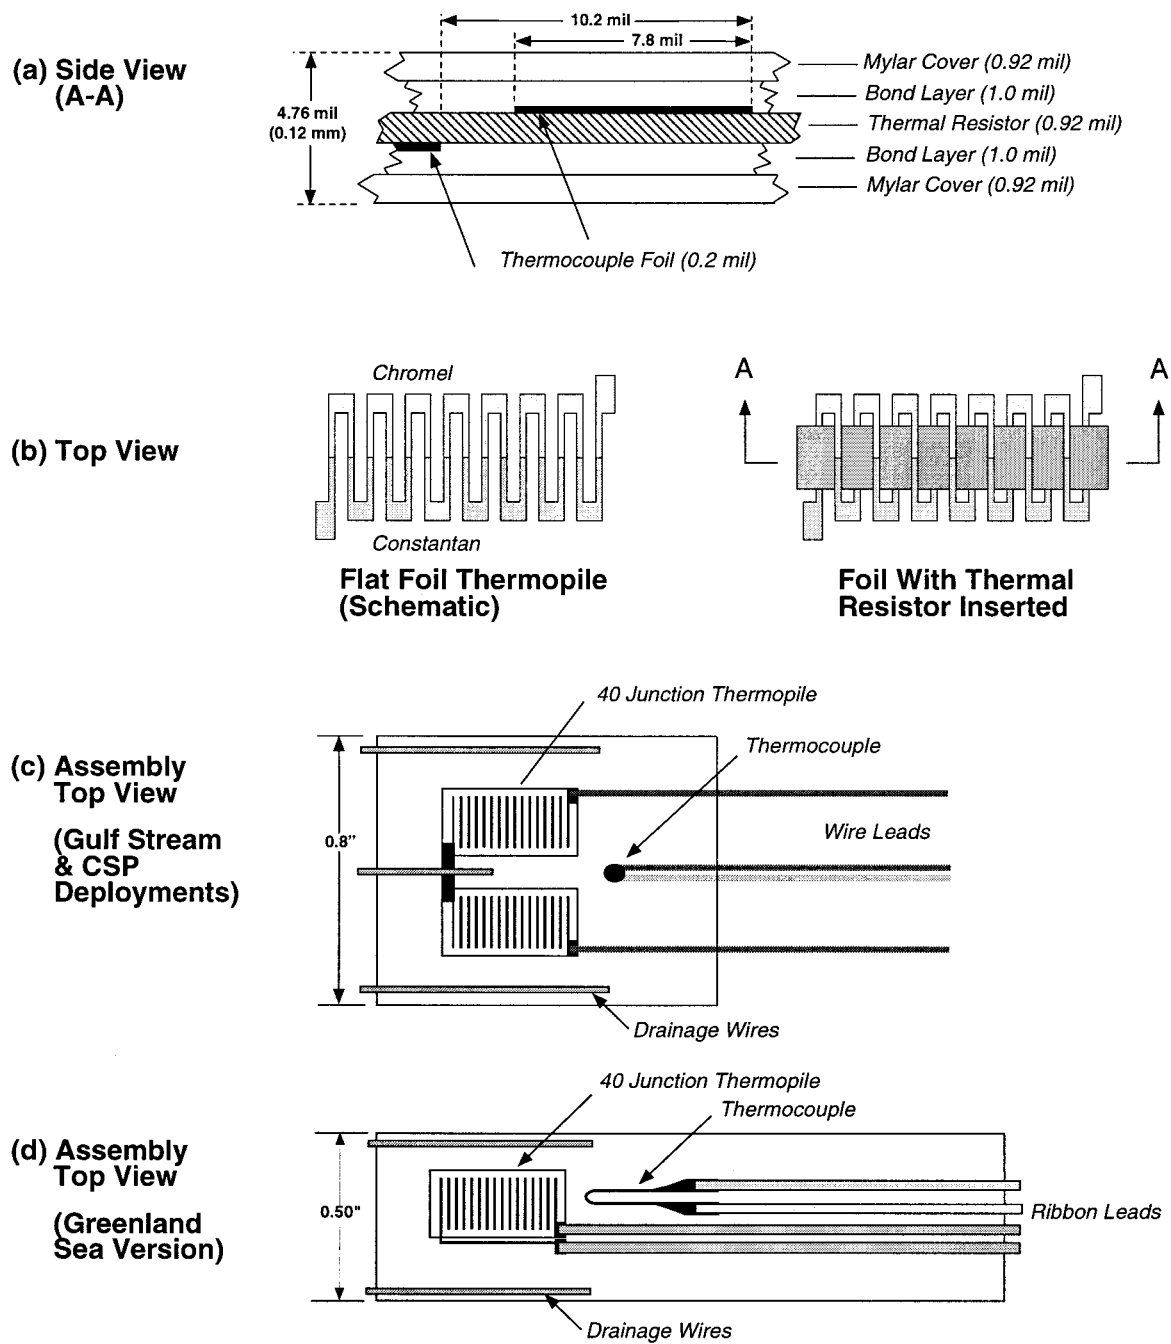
SOHFI flux sensor configuration: (a) cross-sectional view of sensor layer, (b) top view of thermopile junction layout, (c) top view of assembled flux plate sensor used in early ocean tests, and (d) revised design using improved construction techniques.
